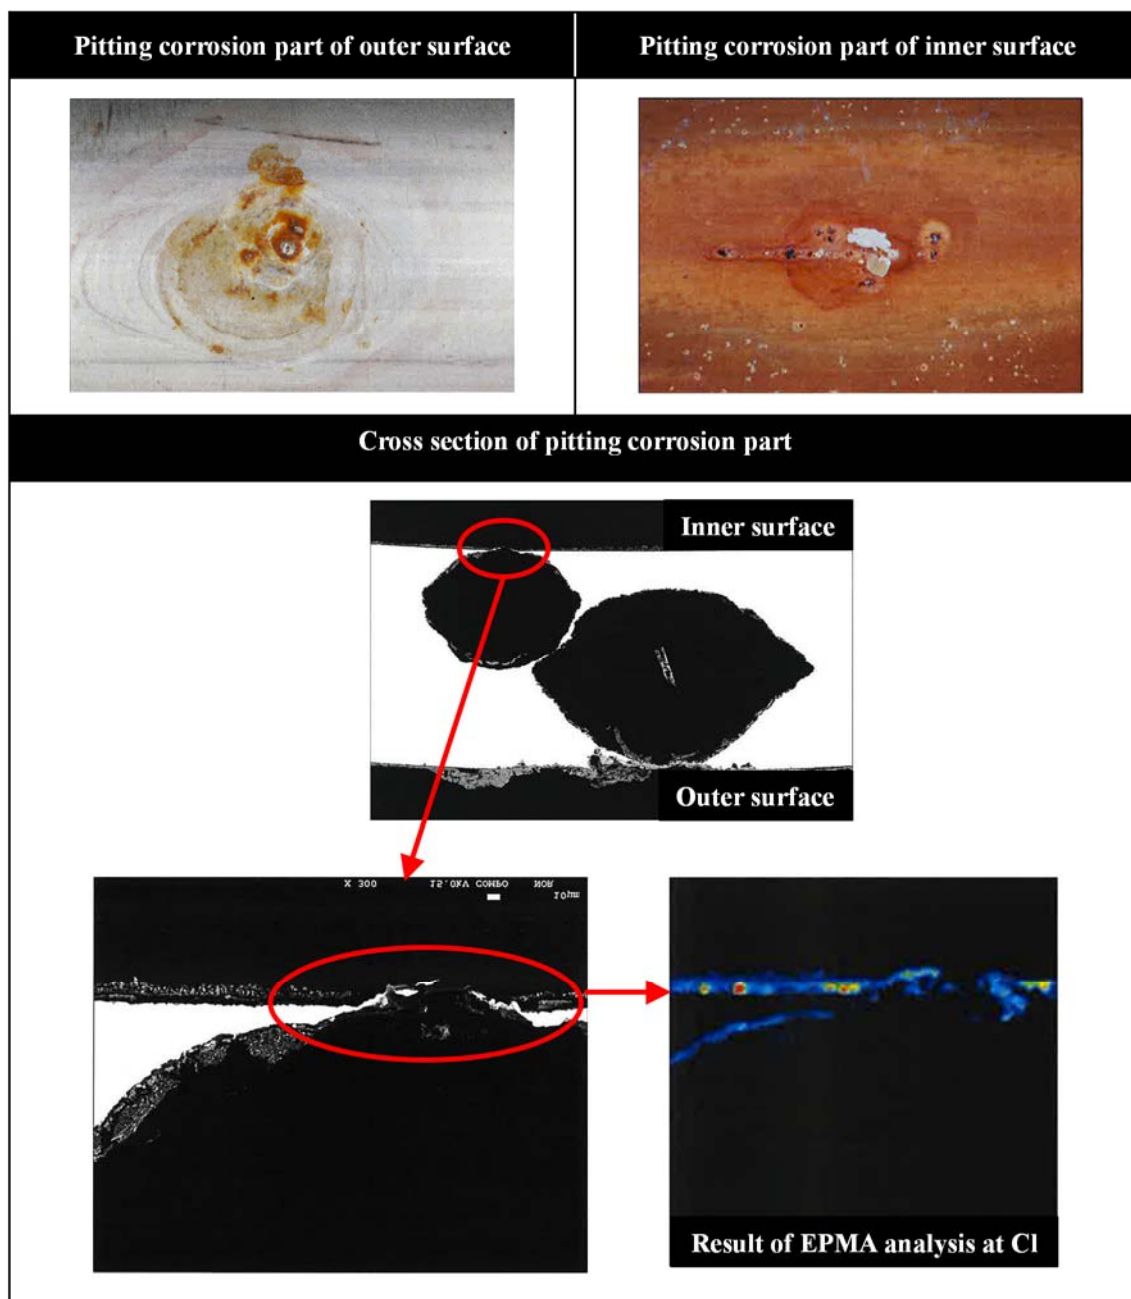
An example of pitting corrosion part of a corrosion case.
